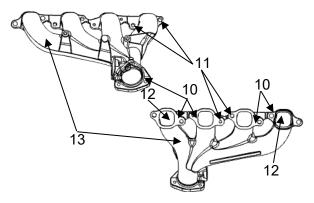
Exhaust Manifold Visual Inspection Locations
